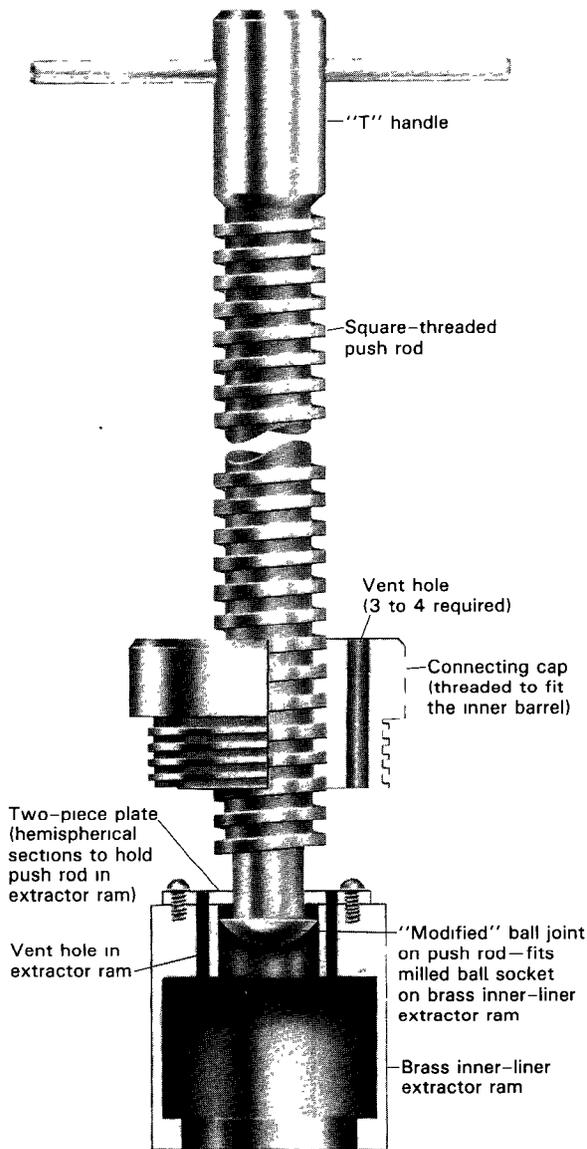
Denison sampler and core-barrel brass inner-liner extruding assembly.
